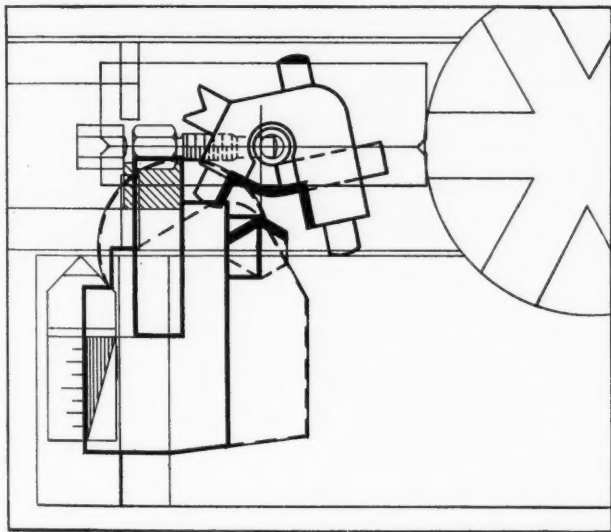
Turret Tool and Cross-slide Toolpost Diagrams
